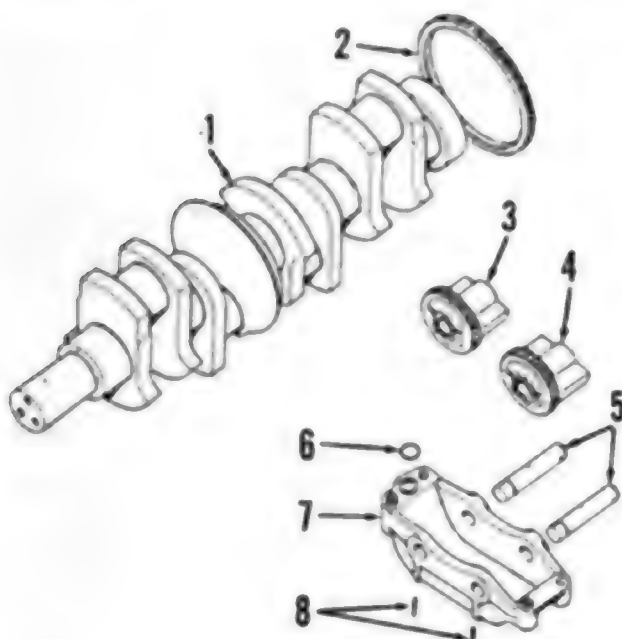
Exploded view of engine balancer used on all models. Balancer drive gear (2) is a shrink fit on crankshaft.
